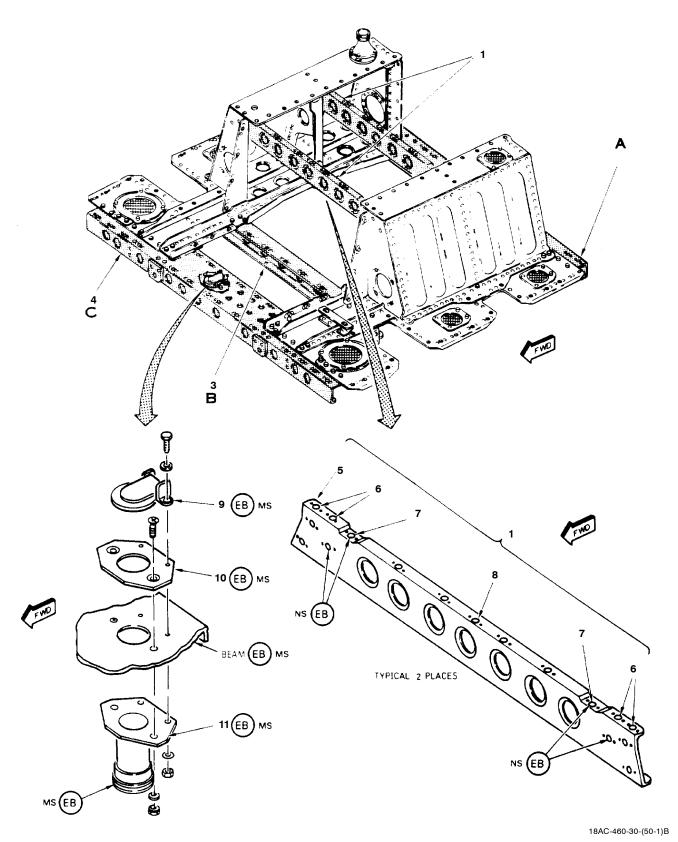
Upper and Lower Support Assemblies (Sheet 1)
